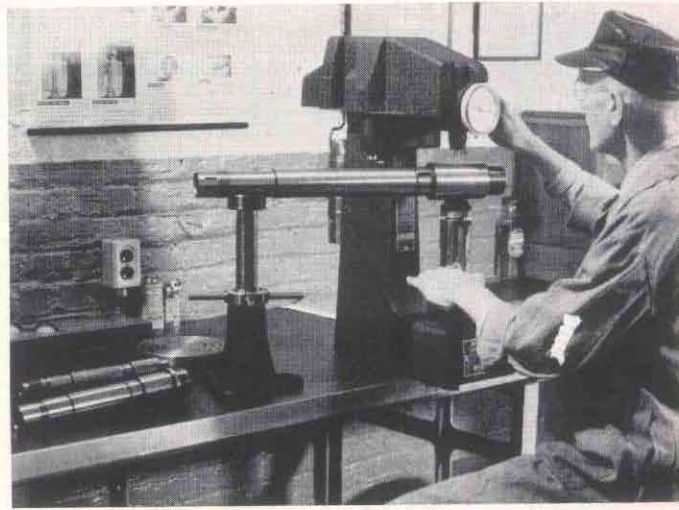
Testing the Hardness of a Carburized Headstock Spindle Bearing Surface
